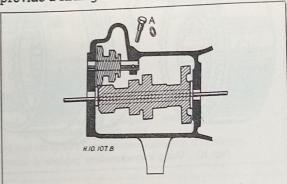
A, reverse shaft locating screw showing laygear moved out of positioned line to enable the reverse gear to be positioned.
